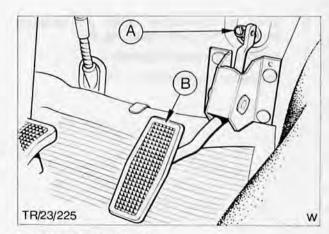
Pedal shaft assembly A – Accelerator cable B – Accelerator pedal
